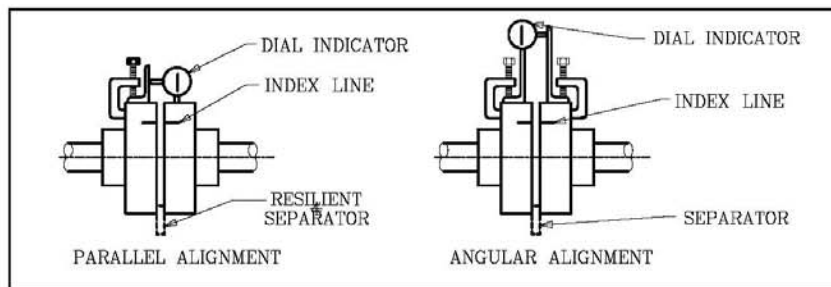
TESTING ALIGNMENT, DIAL INDICATOR
